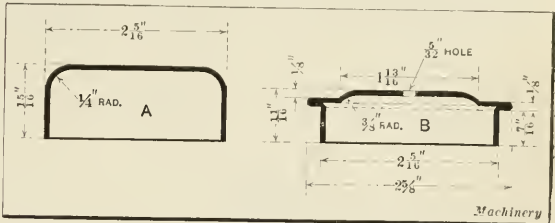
Cup for Pressed Steel Cover and Finished Cover
